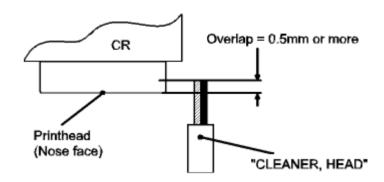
Overlap of Head Surface and the Cleaner Blade
